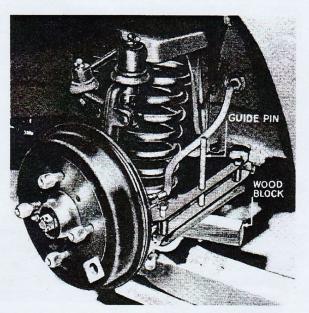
Method of supporting spring pan whilst removing four outer securing bolts
